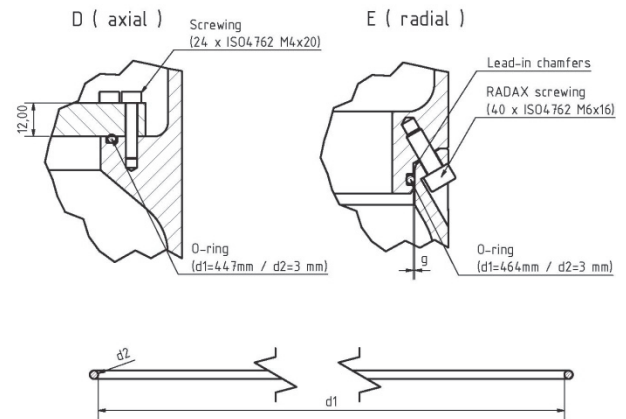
Detailed drawing of axial (D) and radial (E) sealing of the payload enclosure
